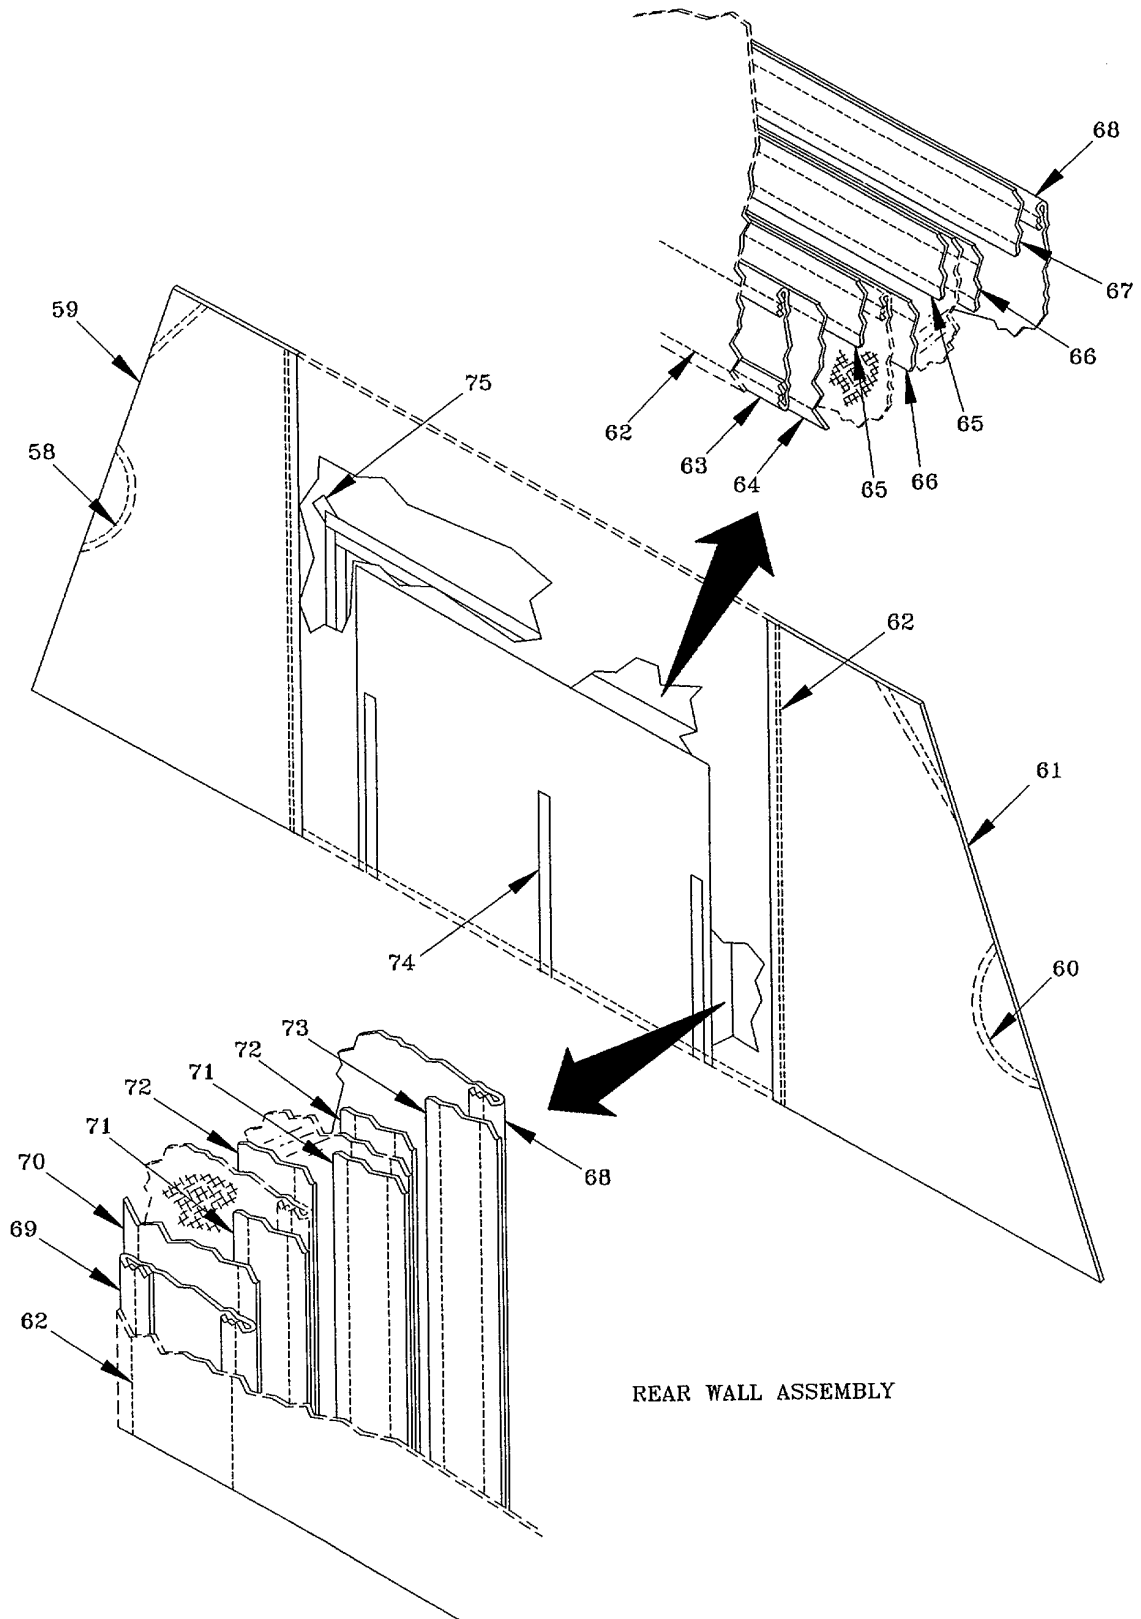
TENT BODY ASSEMBLY (Sheet 7 of 10)
